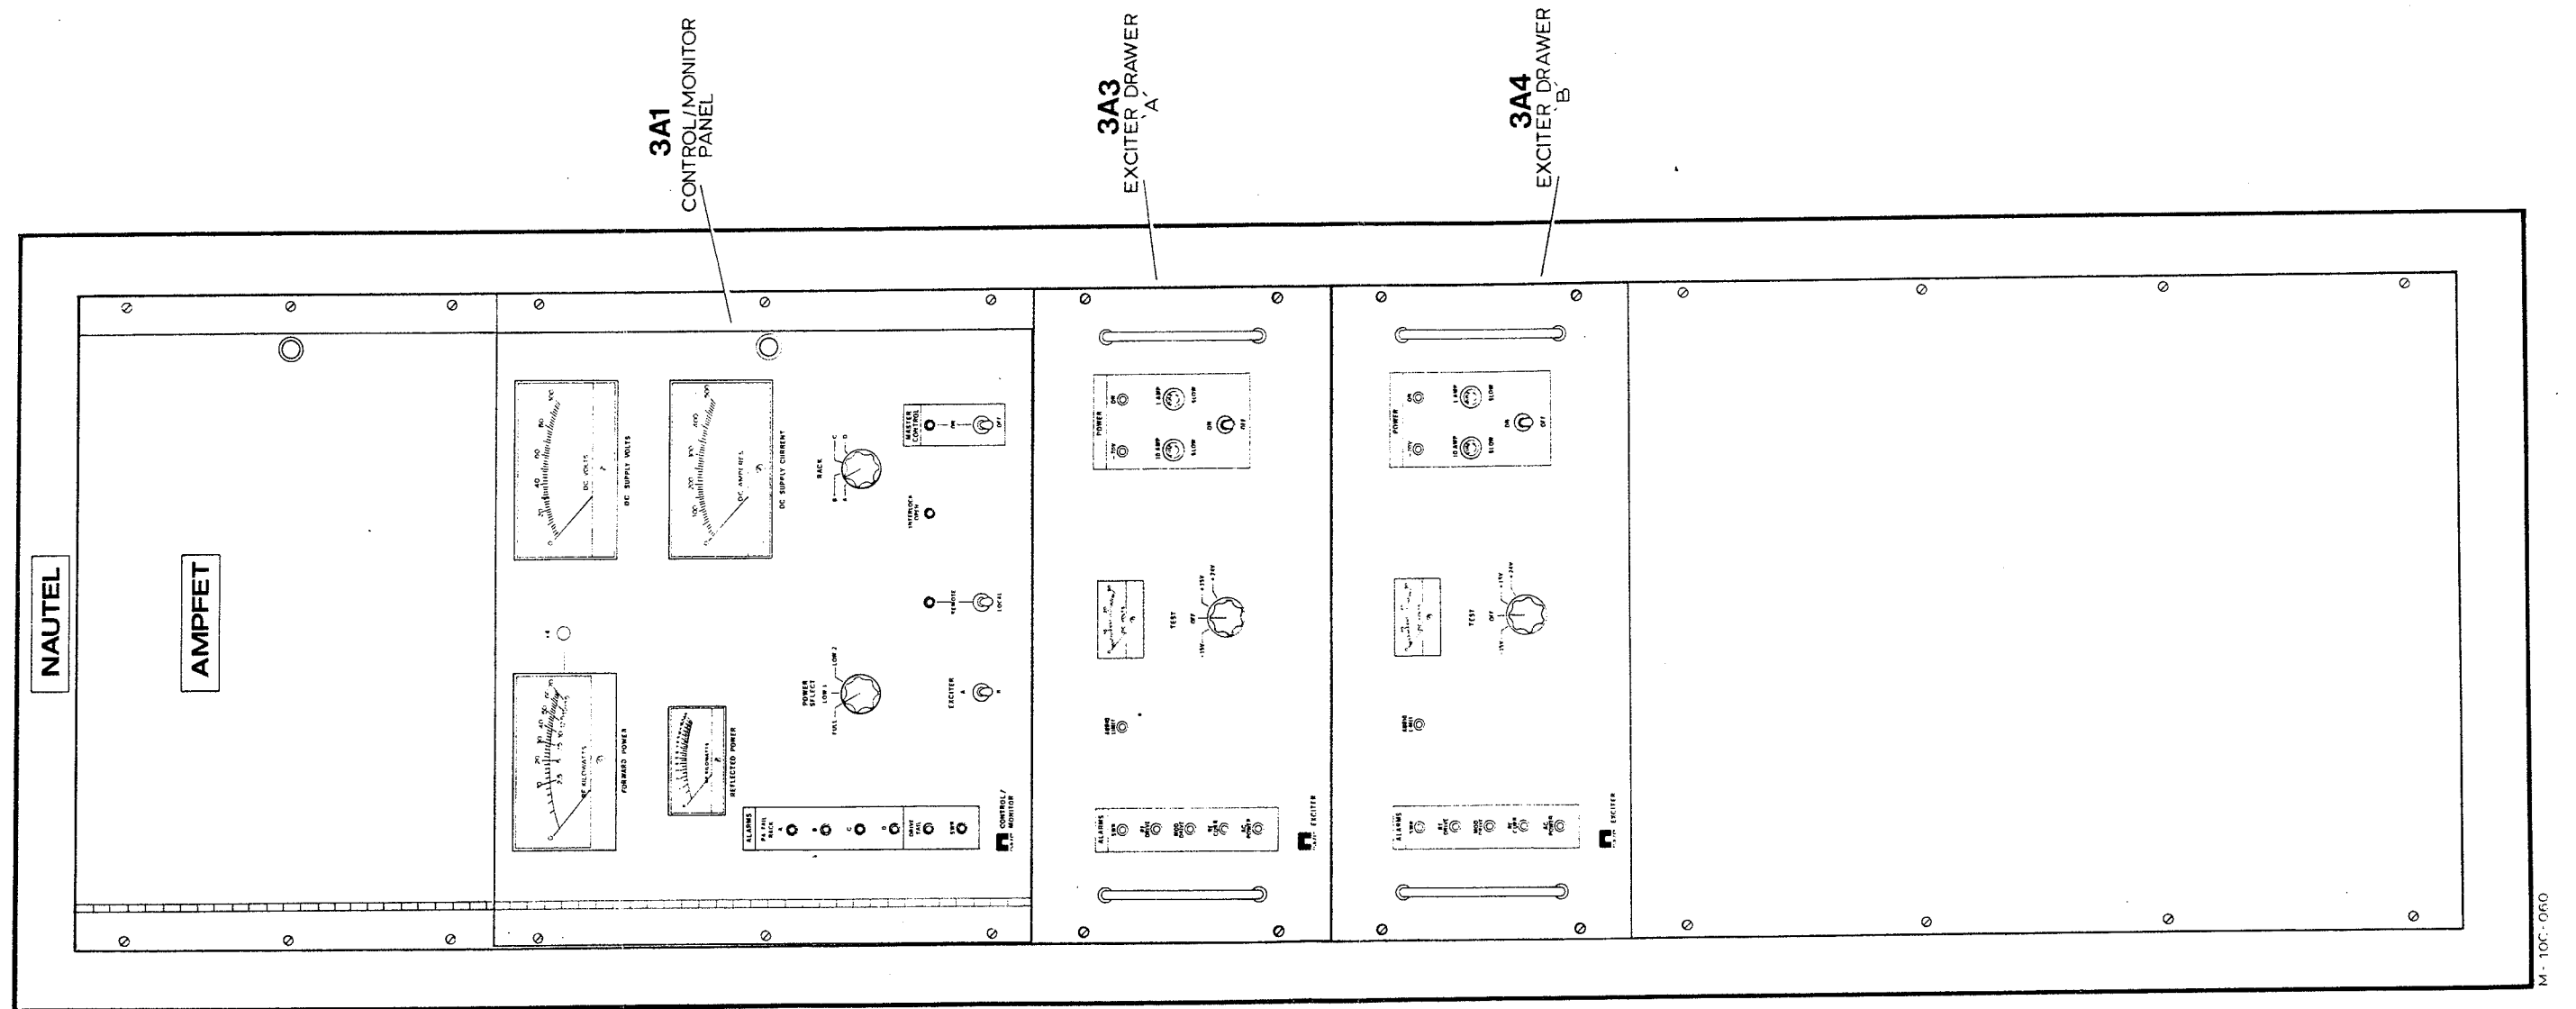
Assembly Detail - NAR69 Control/Monitor Cabinet (Front View)
